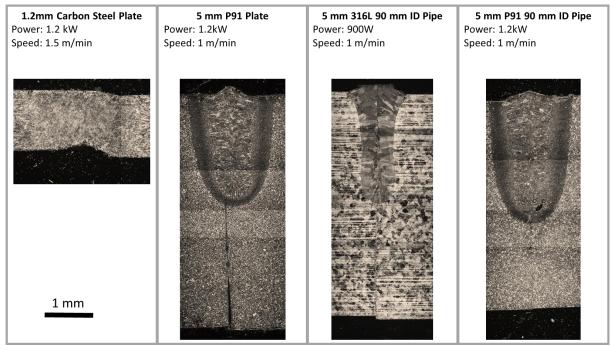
Cross-sections of welds produced by the miniaturised laser welding head. The notes above each cross-section lists the process conditions and material sample.
